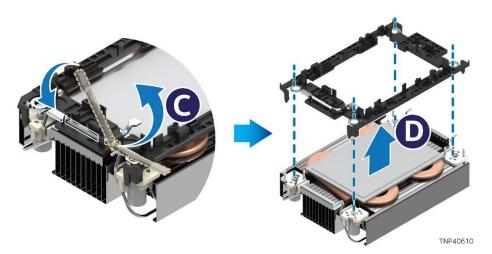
Processor Carrier Clip Removal from PHM Assembly
